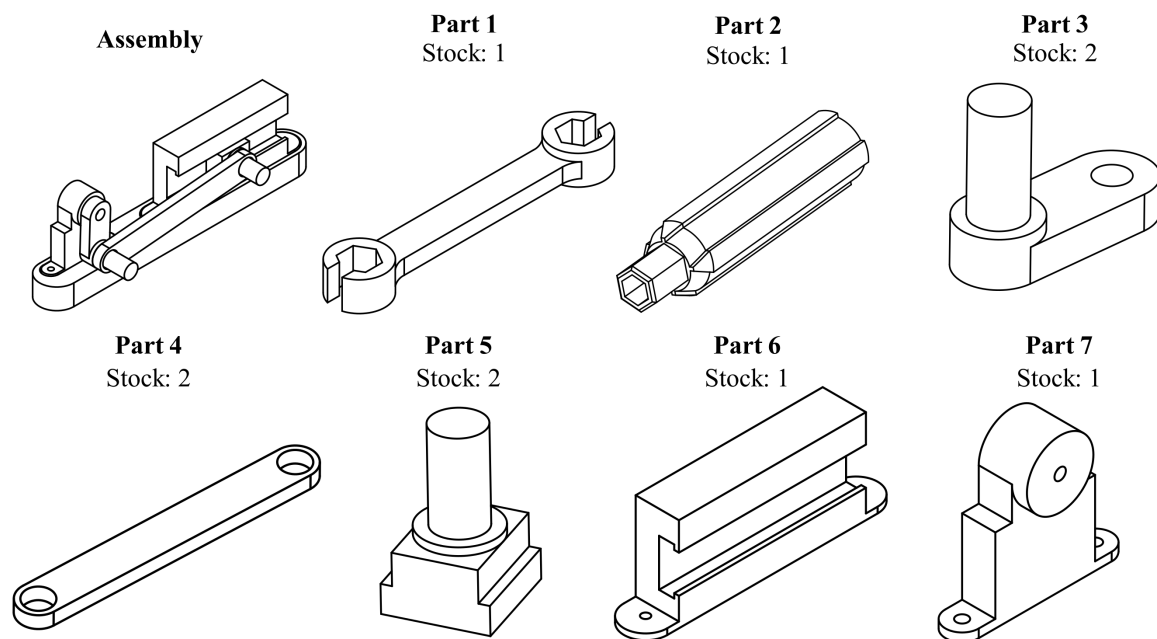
Sketches of printed parts for the assembly of a connecting rod–crank mechanism.
